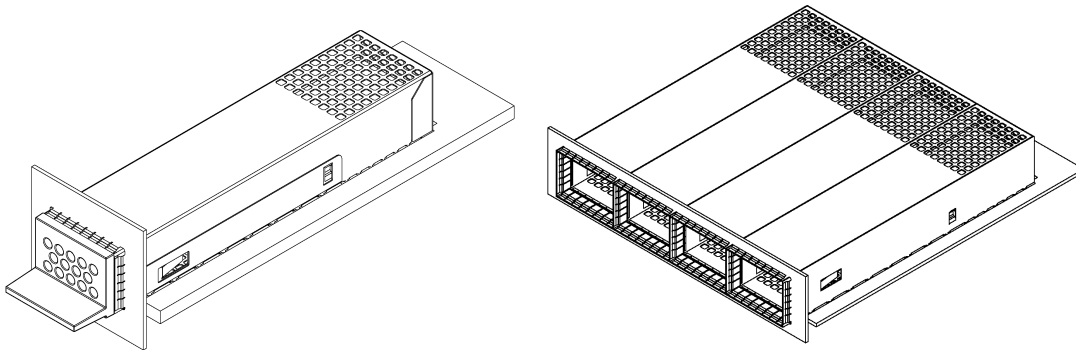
1x1 cage, host PCB, panel, and blank plug
